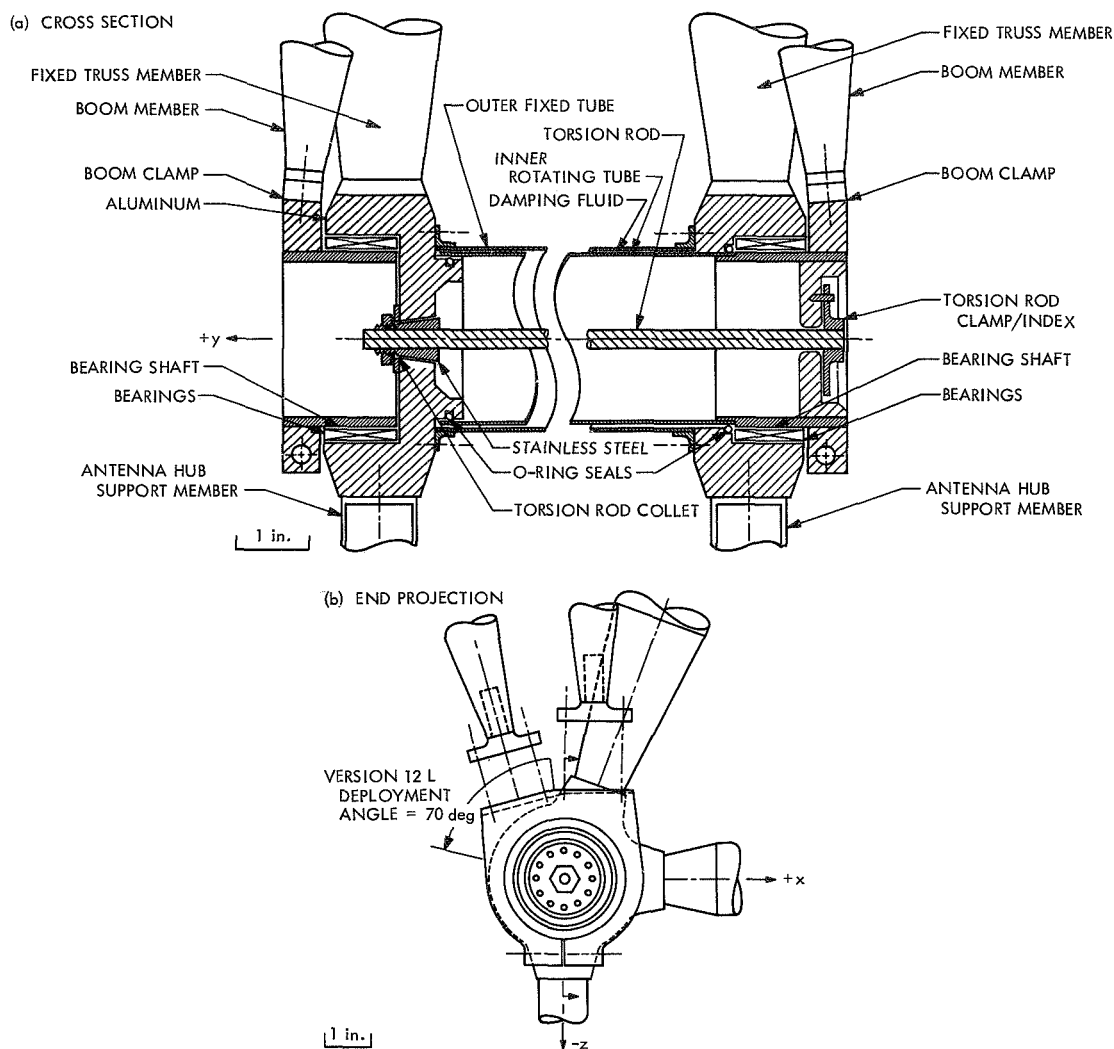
Cross section and end projection of TOPS RTG actuator-damper
